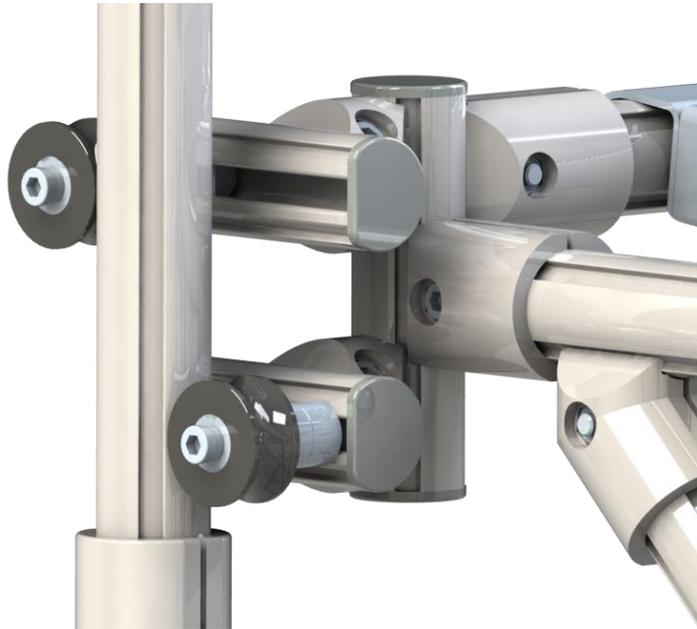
Detail 3. Constructive solution for the guiding system of the lifting platform.
